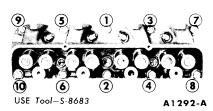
Cylinder Head Bolt Torque Sequence
